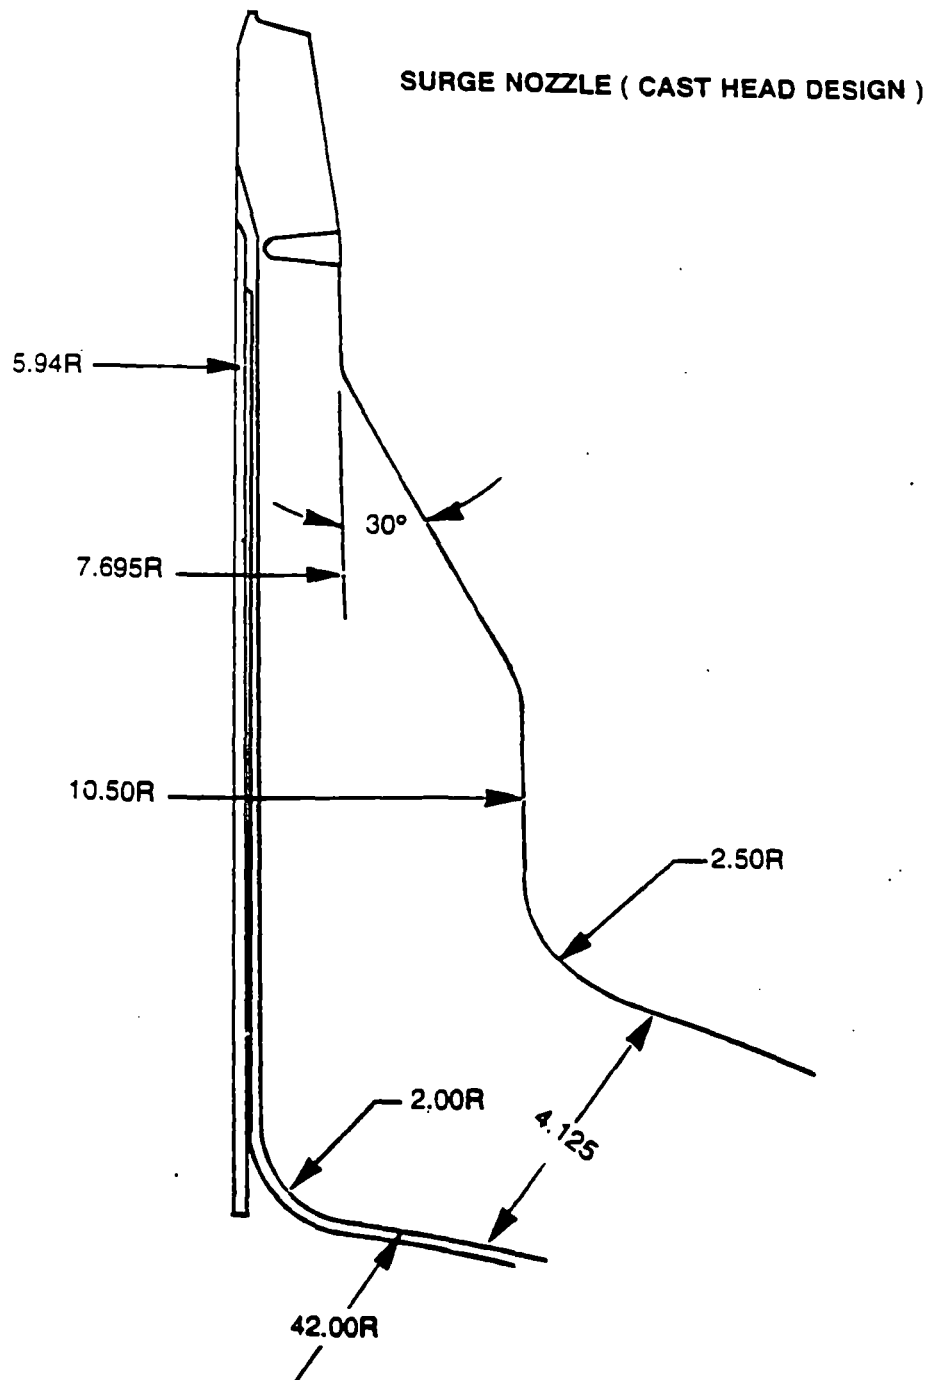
Geometry of a Typical Pressurizer Surge Nozzle - Cast Head Design
